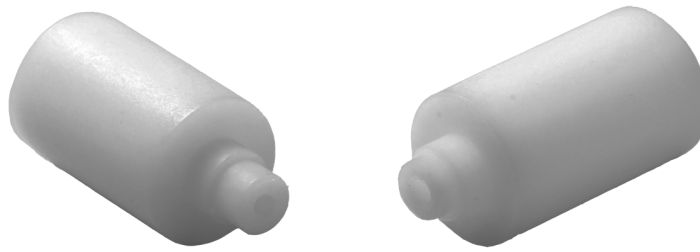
01-107M and 01-107F Soldering Fixtures
